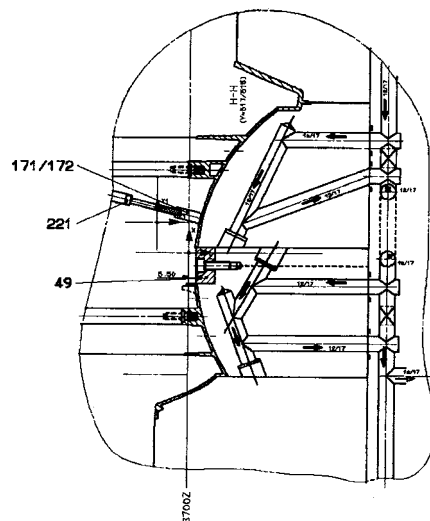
Injection mold for tail light housing, part section with cooling channel arrangement (Courtesy: Bremer Werkzeug- und Maschinenbau GmbH, Germany)
